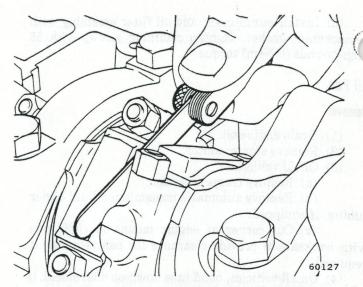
B-131 Connecting Rod Side Clearance Measurement
